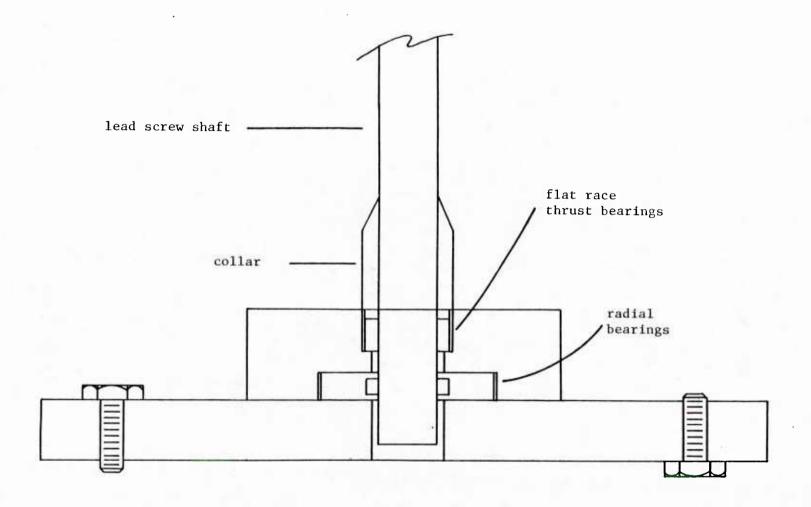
Detail of Lower Lead Screw Shaft Assembly
